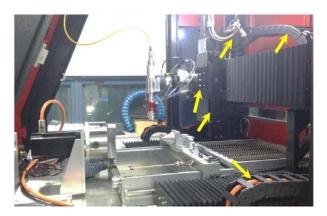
Modification parts to prevent the contamination during the operation of the laser cutting machine in the hotcell.
